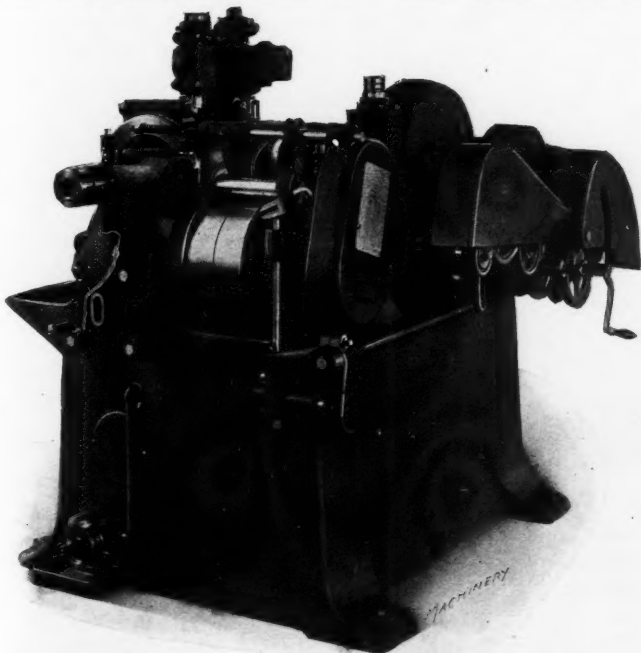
Opposite Side of Machine showing Single Pulley Drive
